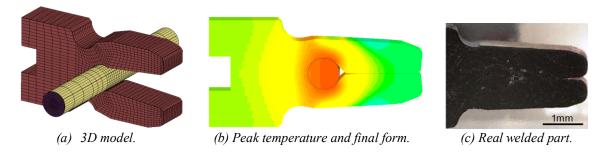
Hot staking (fusing) for joining wire to connector simulated with SORPAS 3D.
